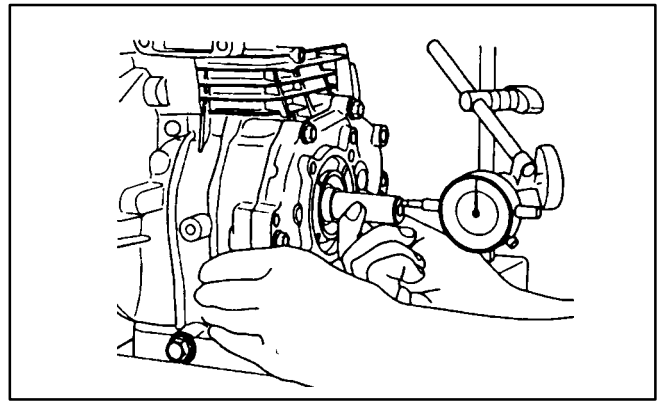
SIDE CLEARANCE OF CRANKSHAFT
